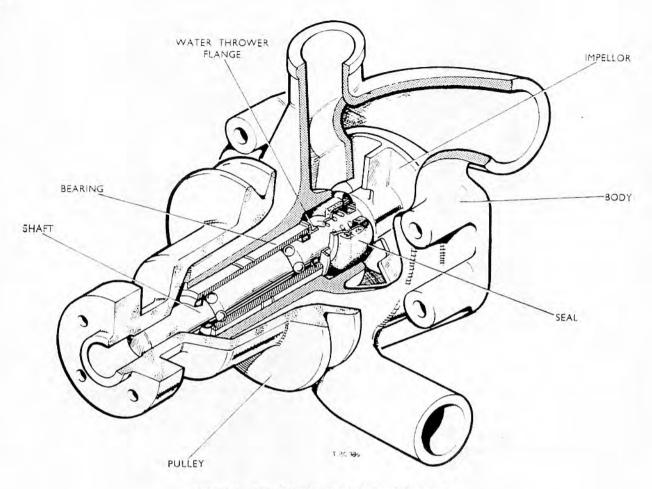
THE WATER PUMP (3-A-152 ENGINE)
